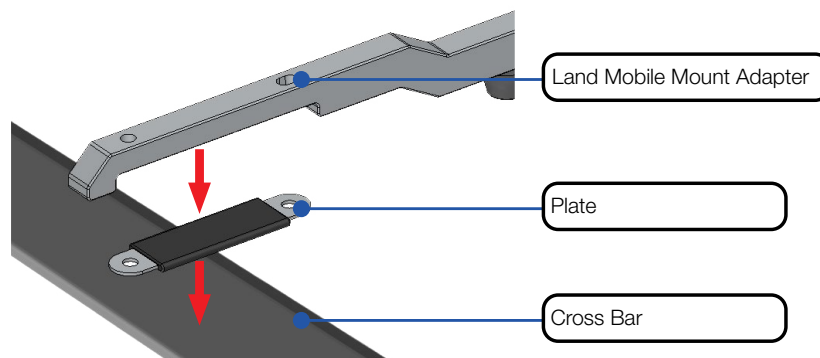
Placing the Plate and Land Mobile Mount Adapter
